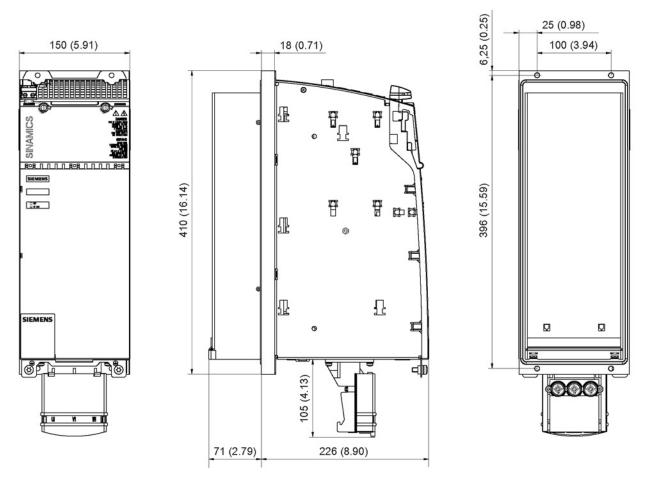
Dimension drawing of 36 kW Smart Line Module with external air cooling, all dimensions in mm and (inches)
